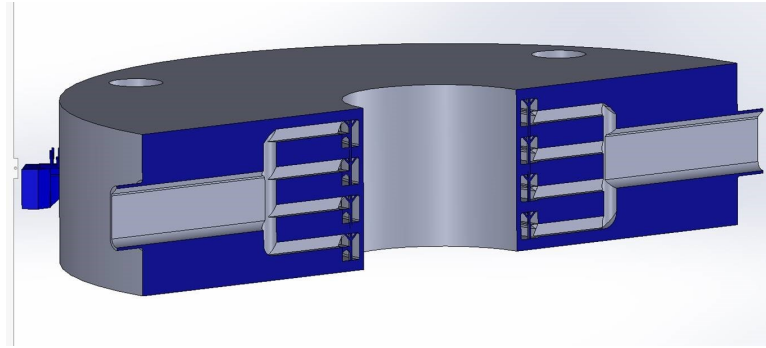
Cross-section view of cylinder with cooling channels in isothermal prototype design.
